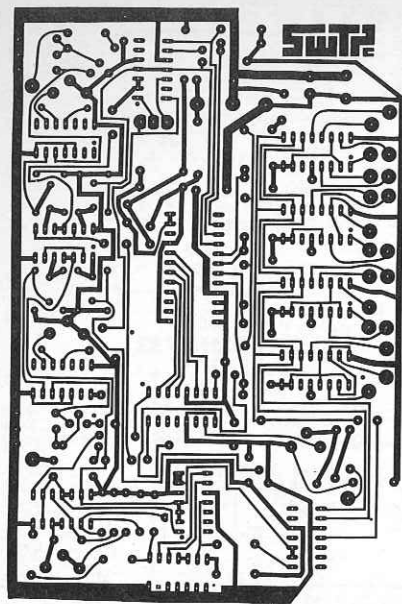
LAYOUT OF THE PRINTED CIRCUIT BOARD, one-half actual size.
